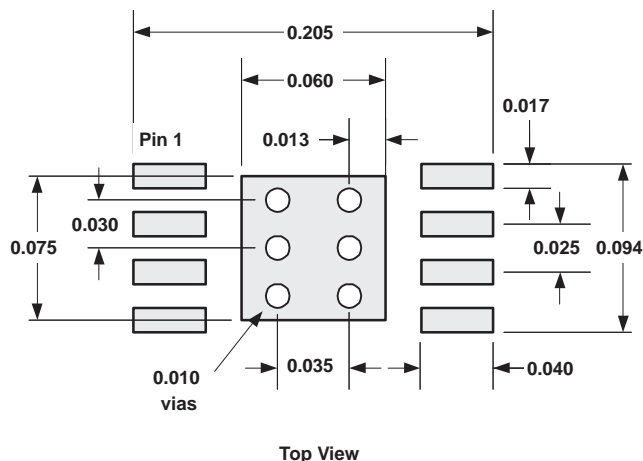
DGN PowerPAD PCB Etch and Via Pattern
